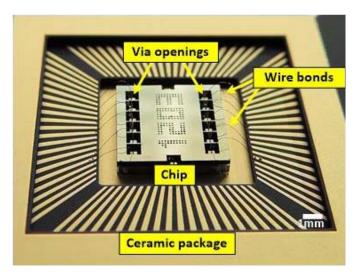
The photograph of a fabricated chip mounted in a ceramic package.
